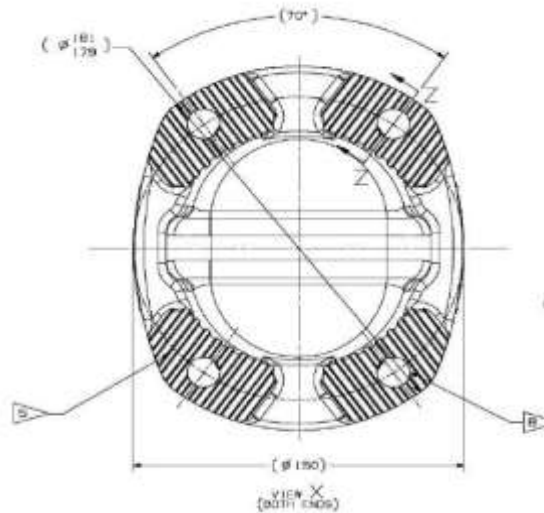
a: Side view, C 2040 Series Flange design of a companion Flange, [12]
